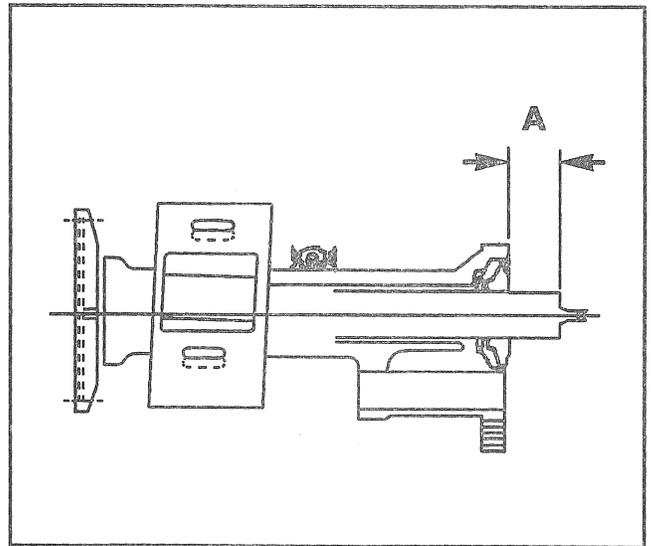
Measuring to Calculate Shim Size—Axle Shaft
